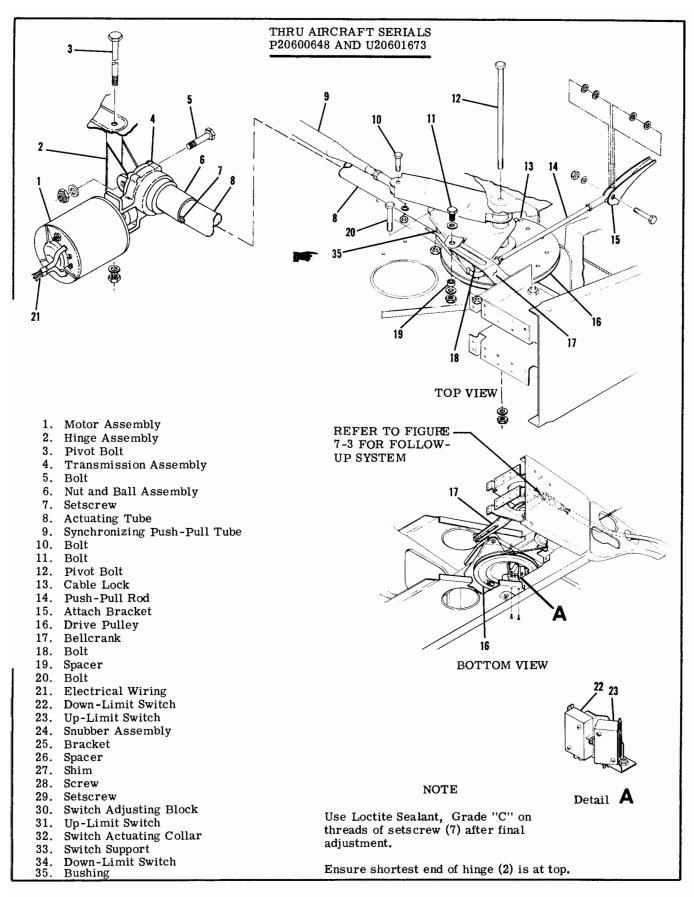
Flap Motor and Transmission Assembly (Sheet 1 of 3)
